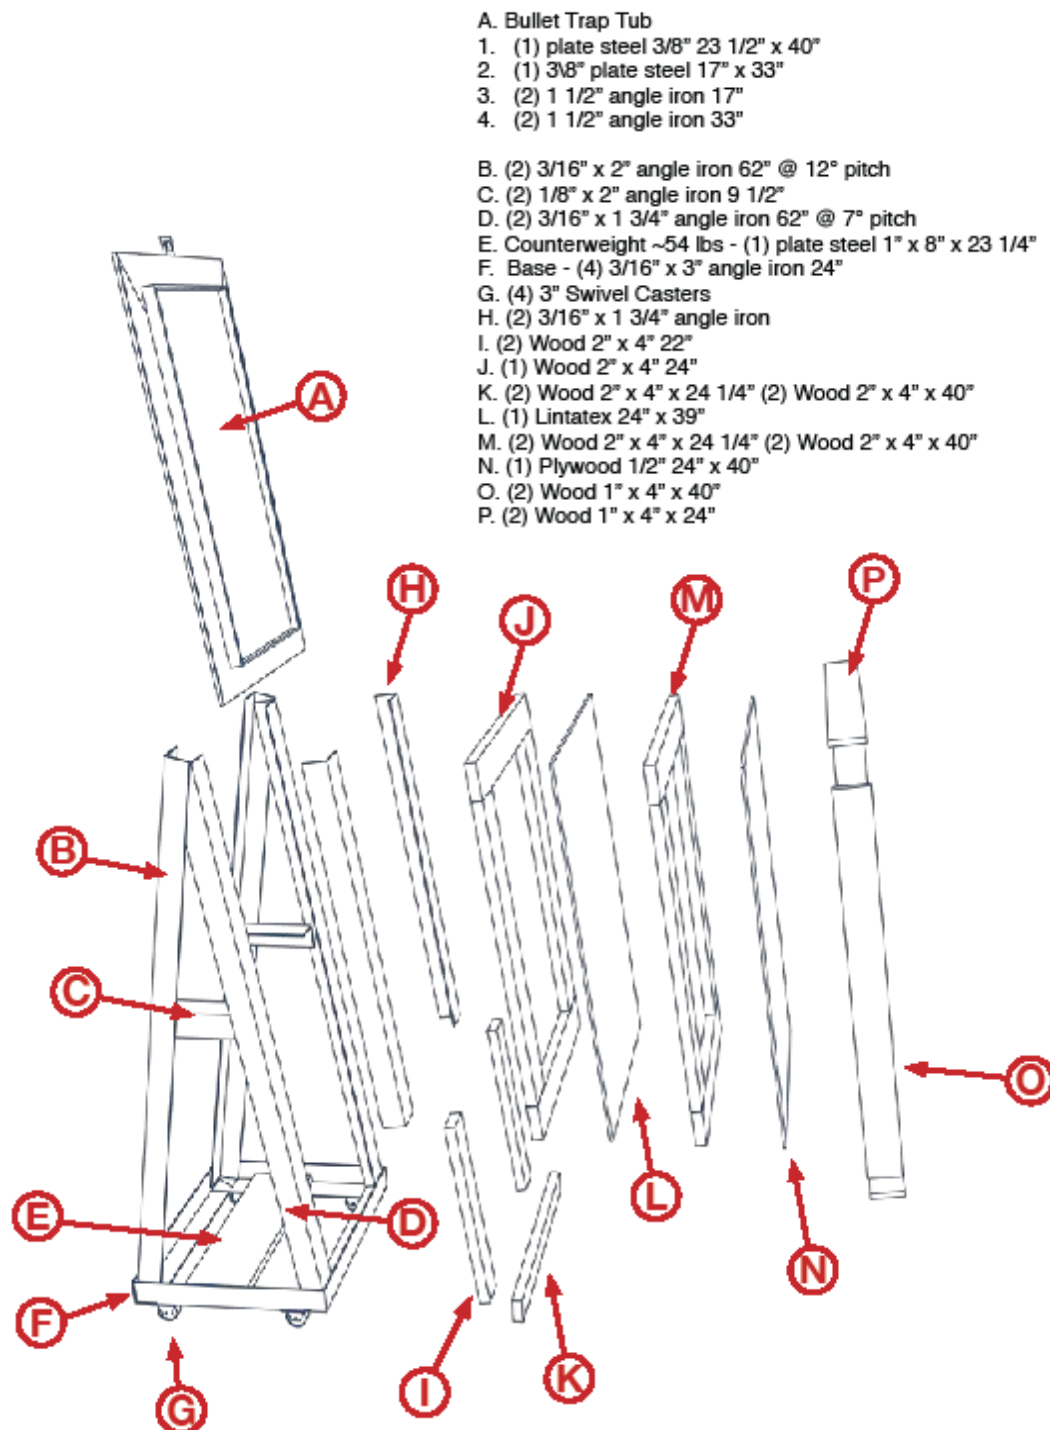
Live-Fire Shoot House Bullet Trap Design
